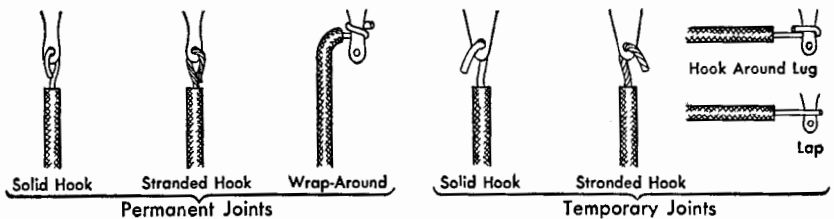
Types of joints used for connecting a wire to a soldering lug
